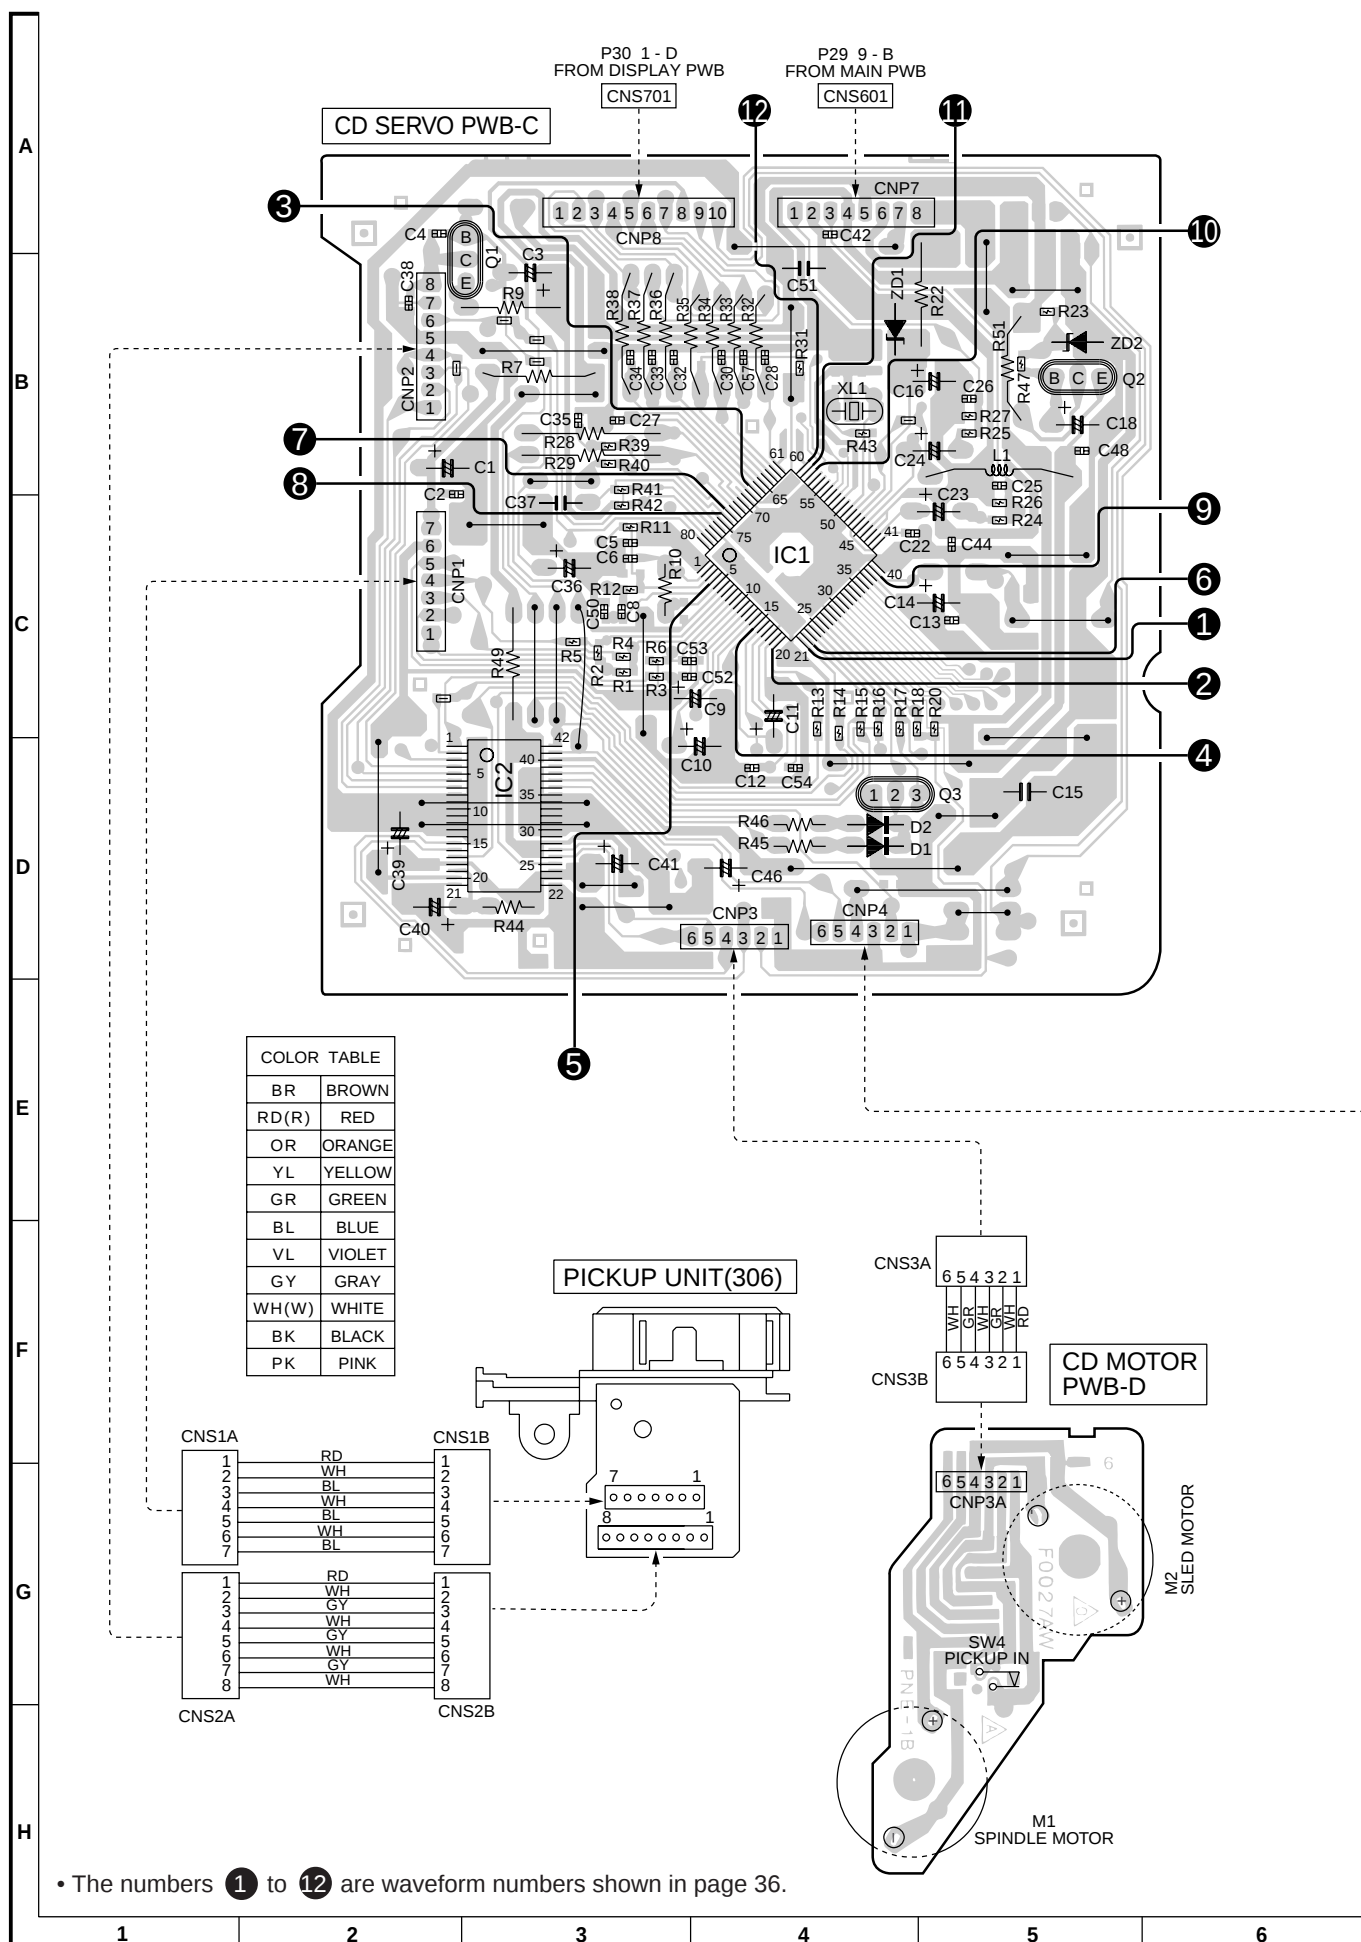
WIRING SIDE OF P.W.BOARD (5/7)
